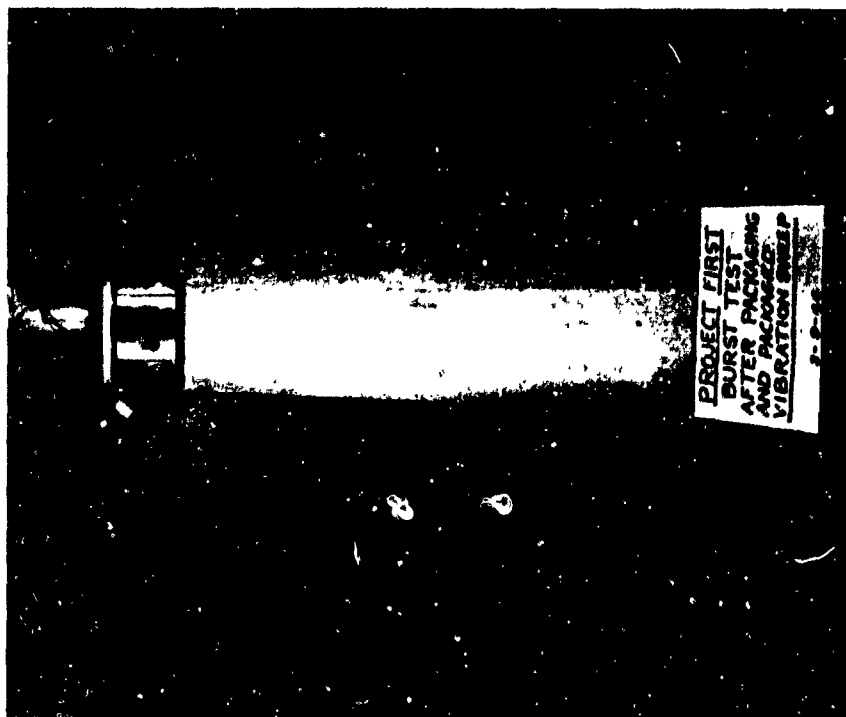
Frustum S/N 6 After Packaging and Prior to Burst Test (Test 4)
